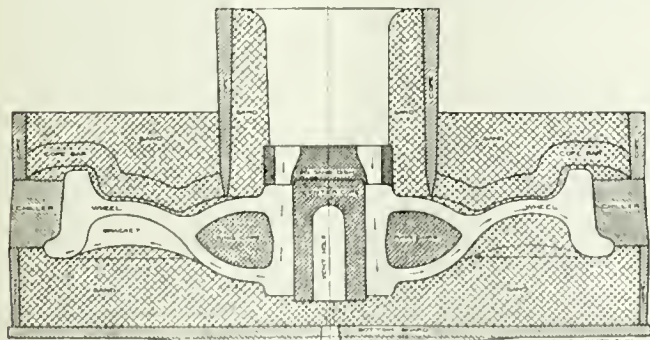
CROSS SECTION OF CAR WHEEL MOLD SHOWING DIRECTION OF FLOW OF METAL.
